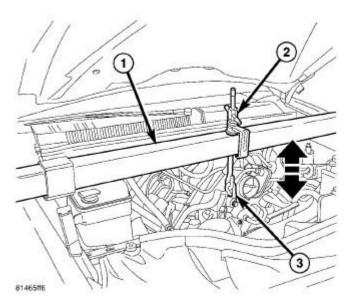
ENGINE SUPPORT TOOL Courtesy of CHRYSLER LLC
